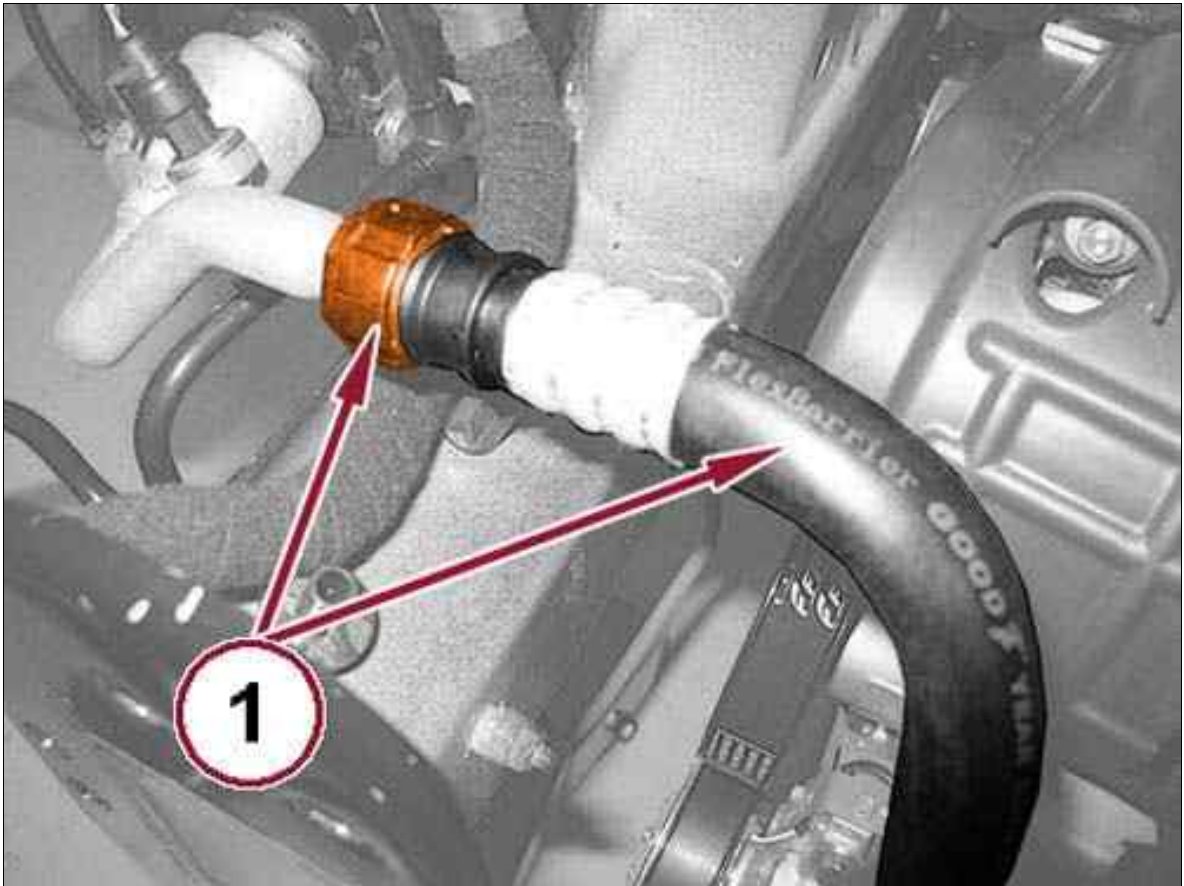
Front Fuel Vapor Pipe & Band At Solenoid Valve Side, Quick Coupling At Fuel Manifold Supply Pipe At Rail Side, Pipe Retaining Clips & Vacuum Air Pipe & Band At Throttle Body
